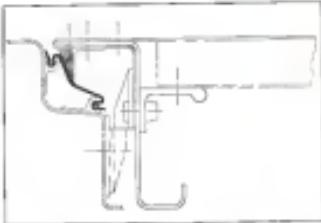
Door and hatch self-sealing neoprene sheet is strip material held against locating blocks and inflated by cabin pressure.
